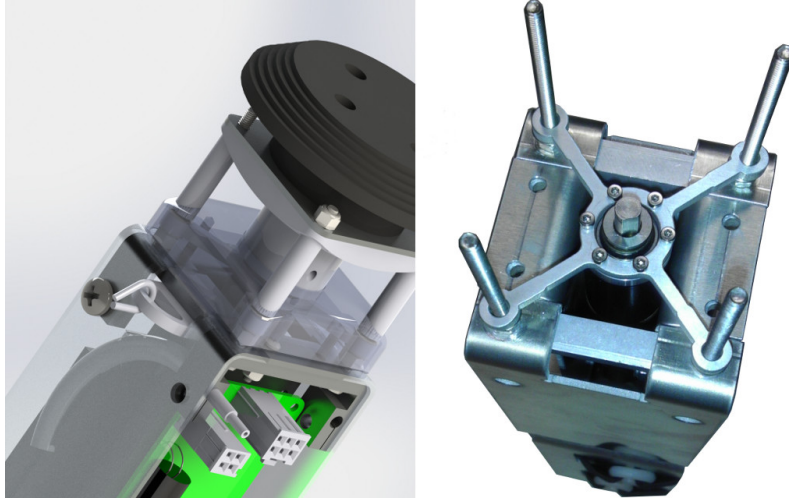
Close-up of the motor assembly. Left: CAD design showing the additional attachments, the cable guide, the spindle etc. Right: Top view of a motor assembly with the spindle and the cable surfaces removed. Strain gages are glued onto the arms of the cross-shaped motor mount for torque measurements.
